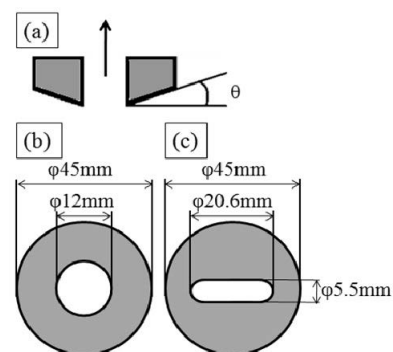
Schematic images of die: (a) cross-section of die, (b) overhead view of die (c) overhead view of die used for bending test.
